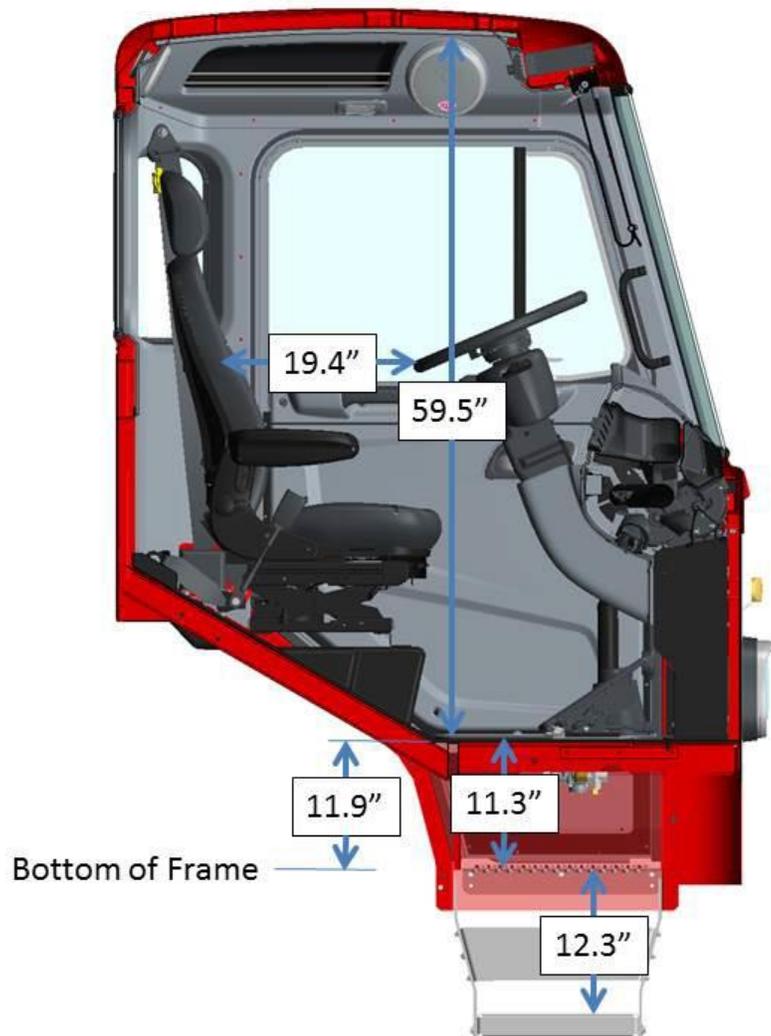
View Looking Through Cab to the Driver's Side (LH Steer)
